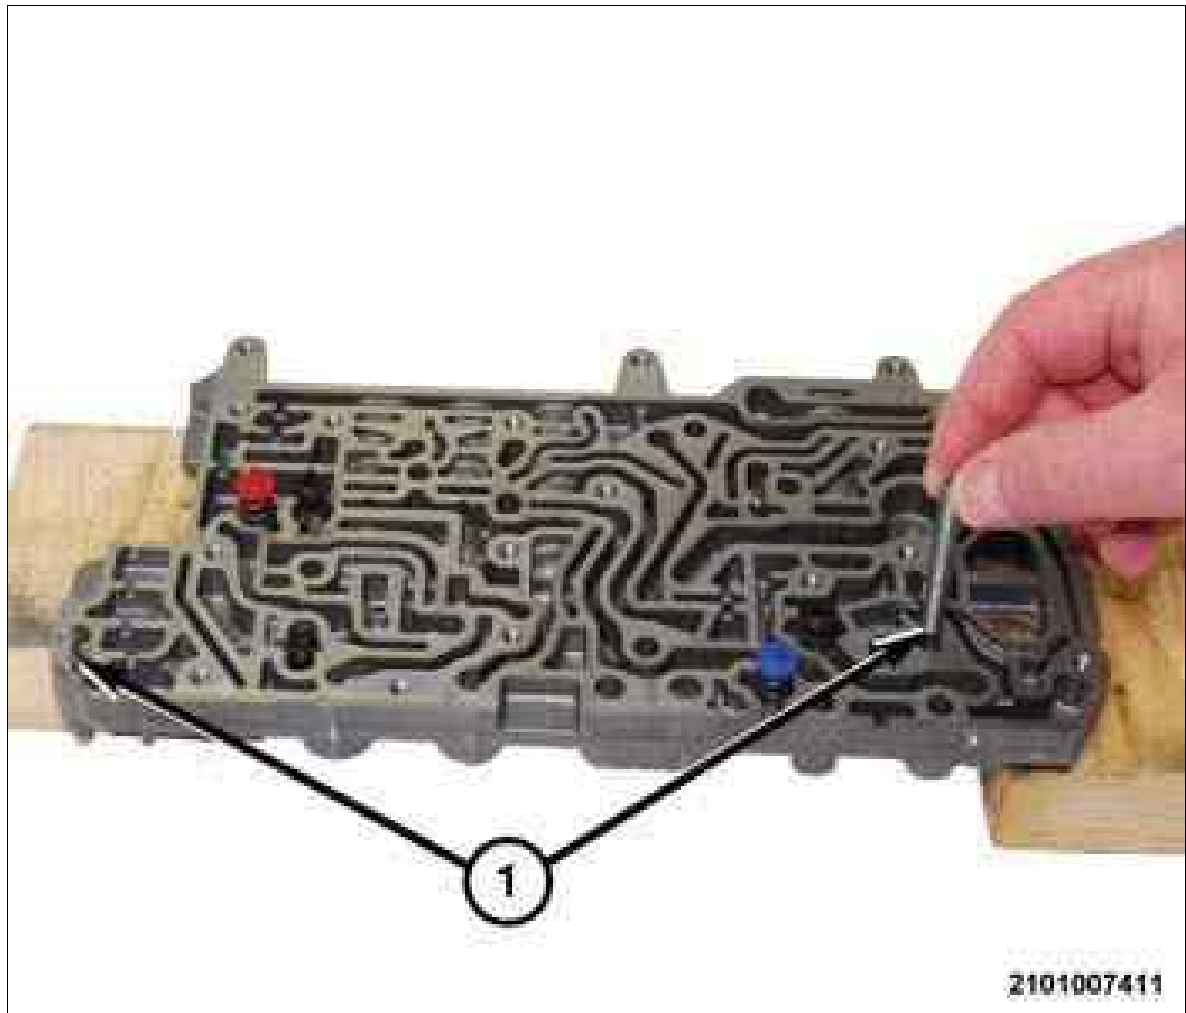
Lifting Separator Plate Off Of Inner Valve Body
